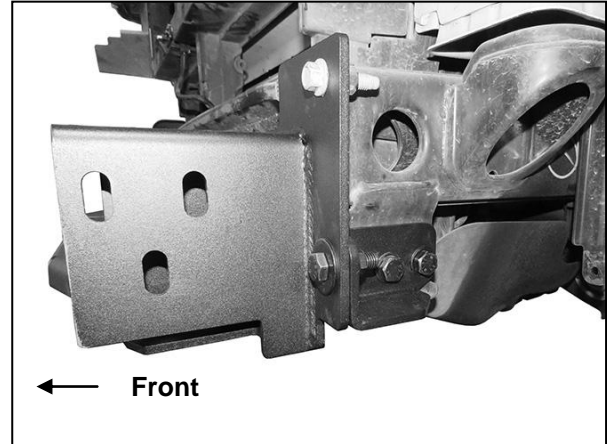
Attach the Winch Tray assembly to the Support Brackets
